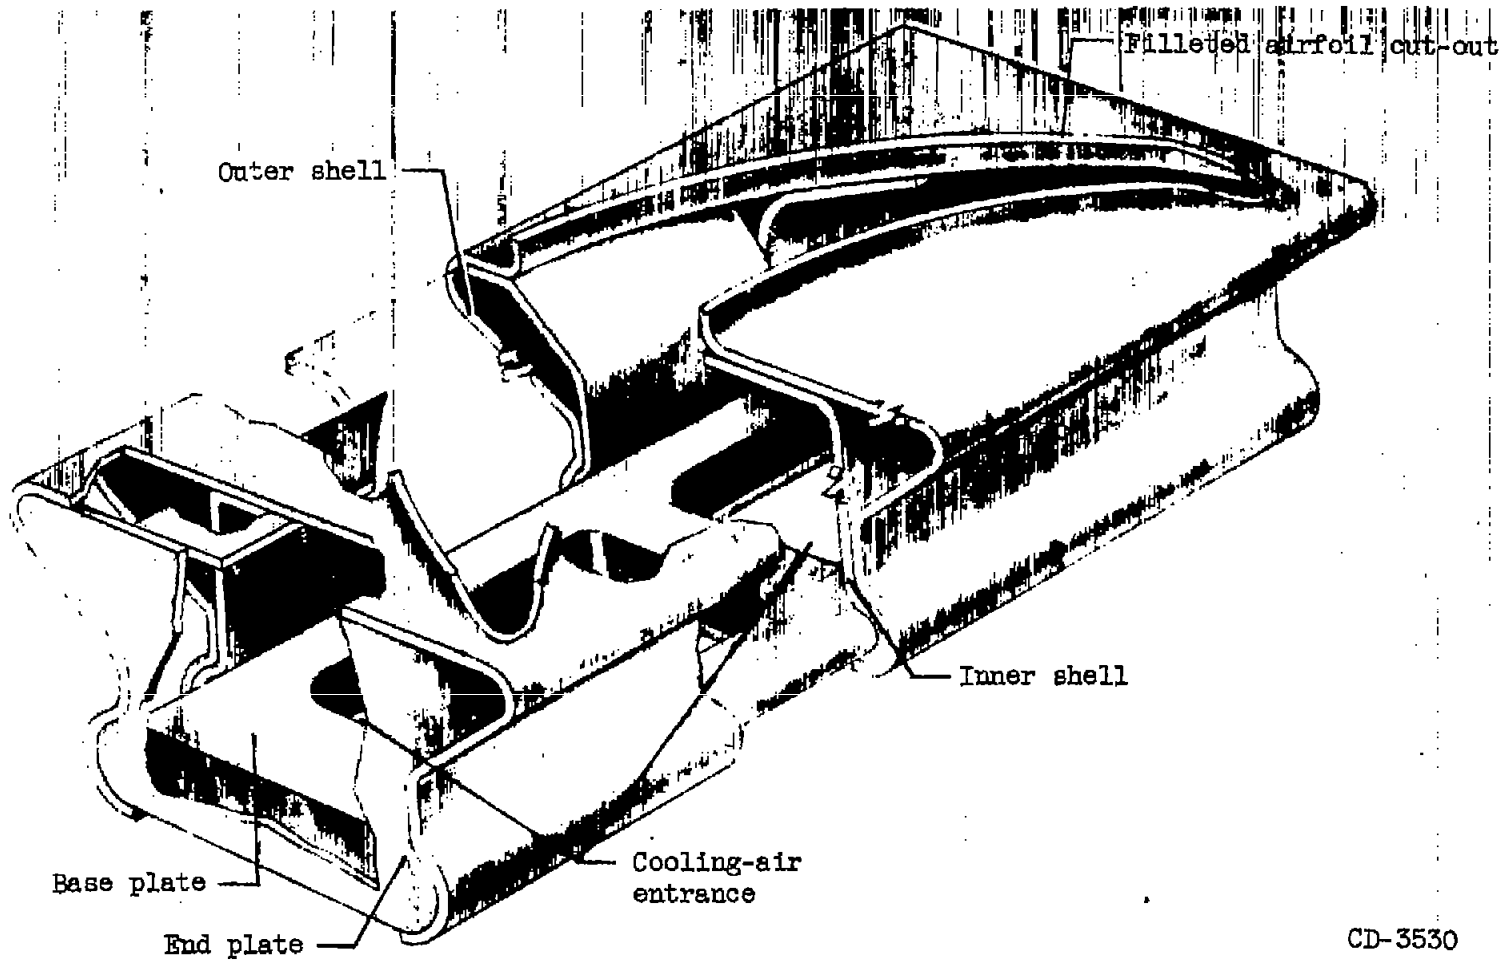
Sheet-metal bulb-root-type air-cooled base, design 1.
